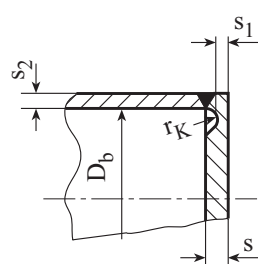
17 Welded-neck endplates with relieving groove
